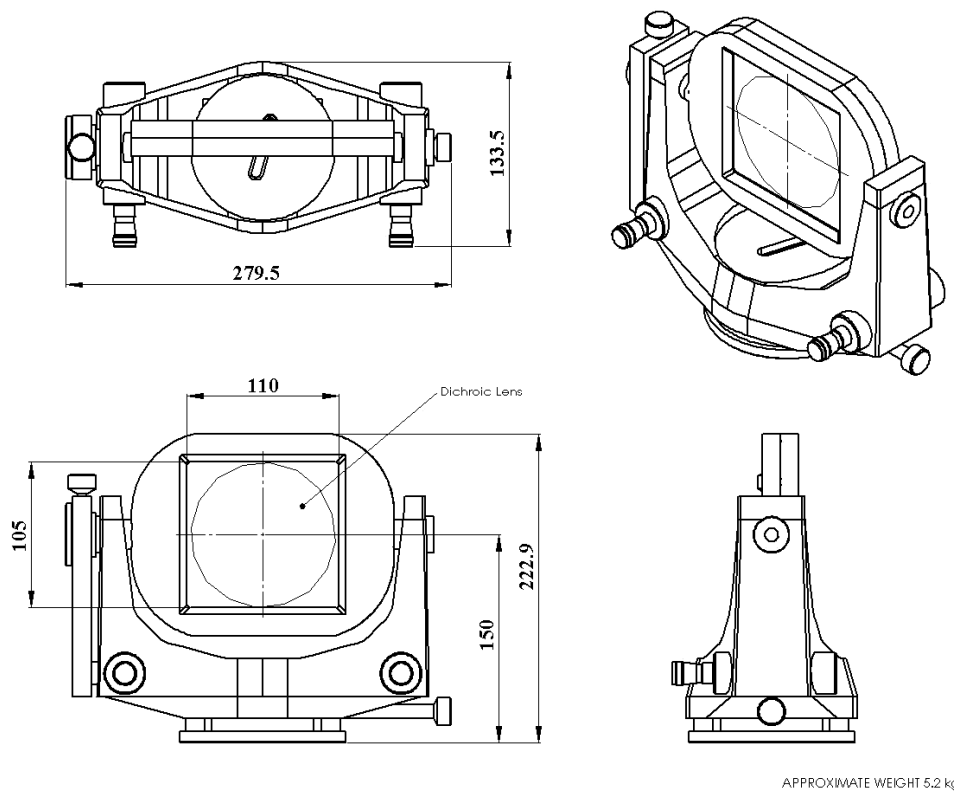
Mechanical drawing of modified commercial gimbal mount.
